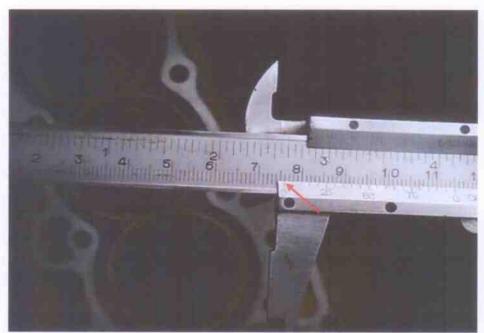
shows the stroke measurement of cylinder 4, which was recorded to be 75.90mm.
